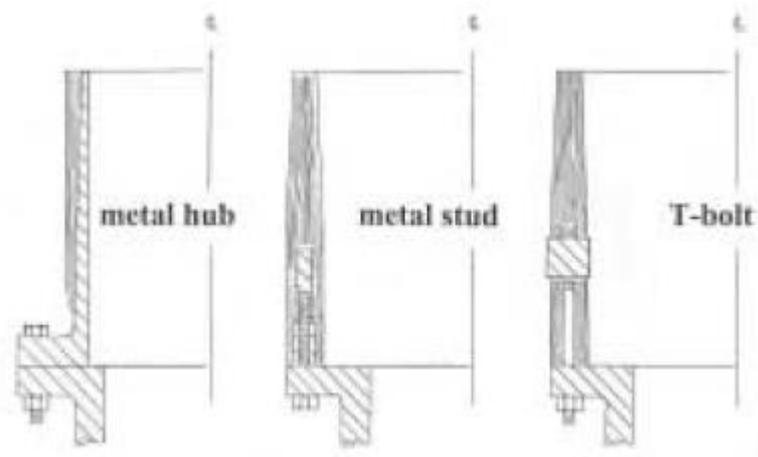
Root design for the large blades (Tangler, 2000)
